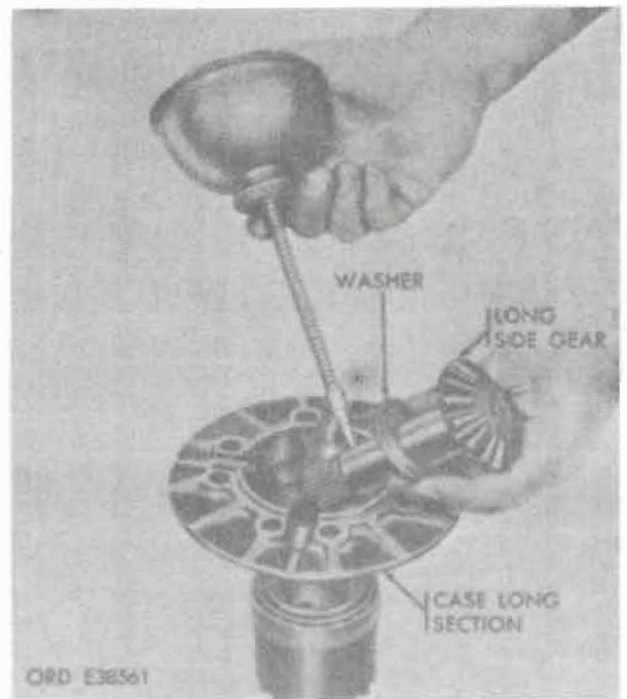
Lubricating and installing long side gear and thrust washer.
